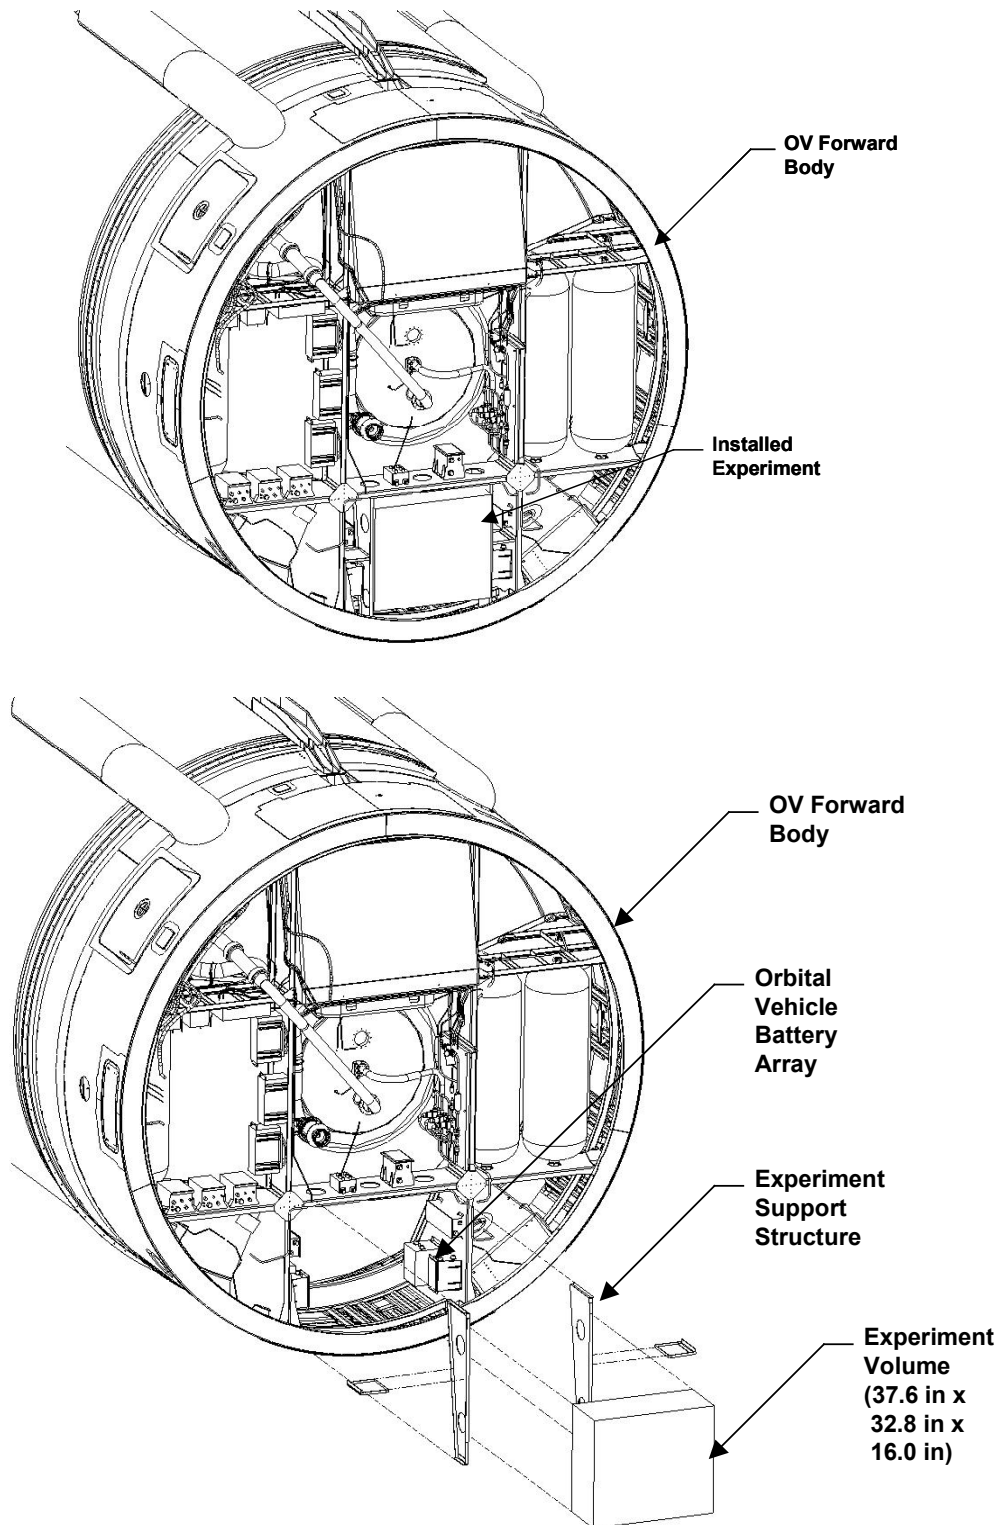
Mounting Structure for Internal Mounting Location in OV Forward
